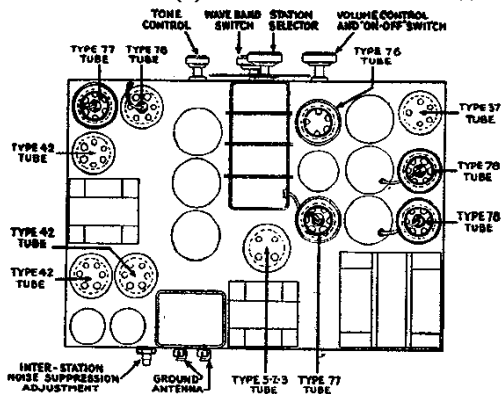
Top View of Chassis, Showing Tube Locations and Major Parts
